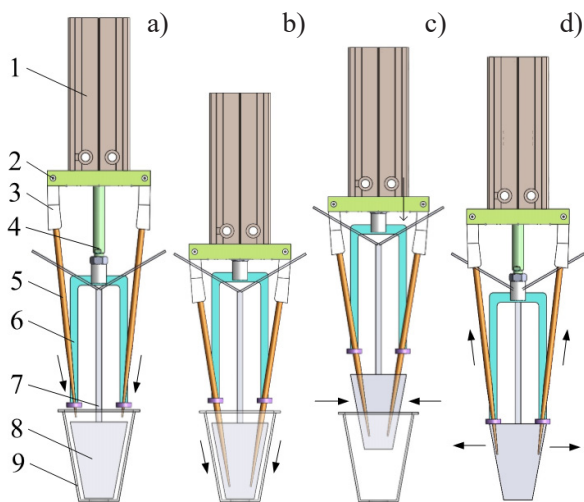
Operation of the gripper for seedling extraction: 1) cylinder block; 2) shaft; 3) swinging finger; 4) piston; 5) pick-up pins; 6) U-type pull rod; 7) seedling; 8) root soil; 9) tray cell.
